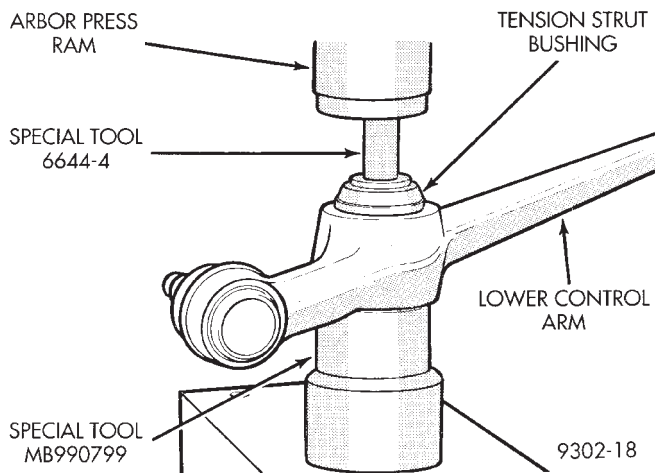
Removing Lower Control Arm Tension Strut Bushing
